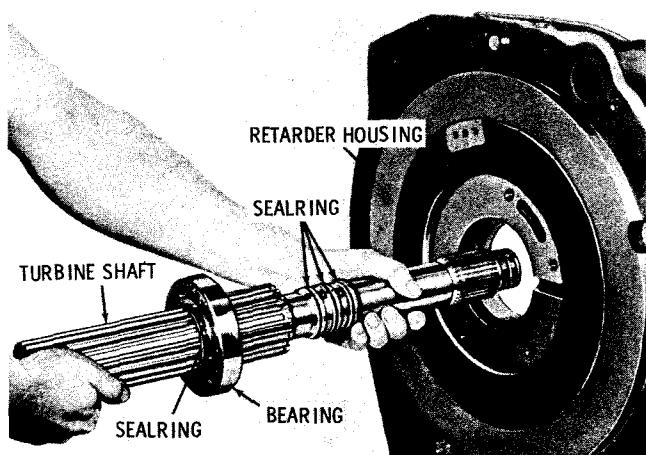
Installing turbine output shaft (CBT, CLBT, prior to S/N 35993) S1688
